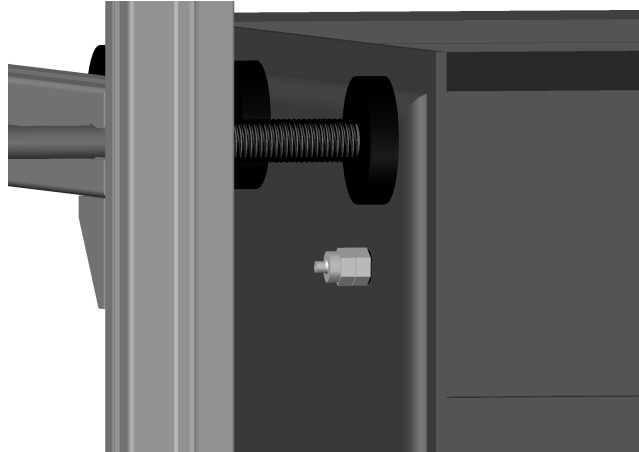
Axonometric view of the male adapter connection to the accumulation chamber. In the figure, the hexagonal fixed nut lies on the black o-ring and the screwing nut used for tube fixing is in the bottom end stop, the position to be assured when a tube is connected to the adapter.
